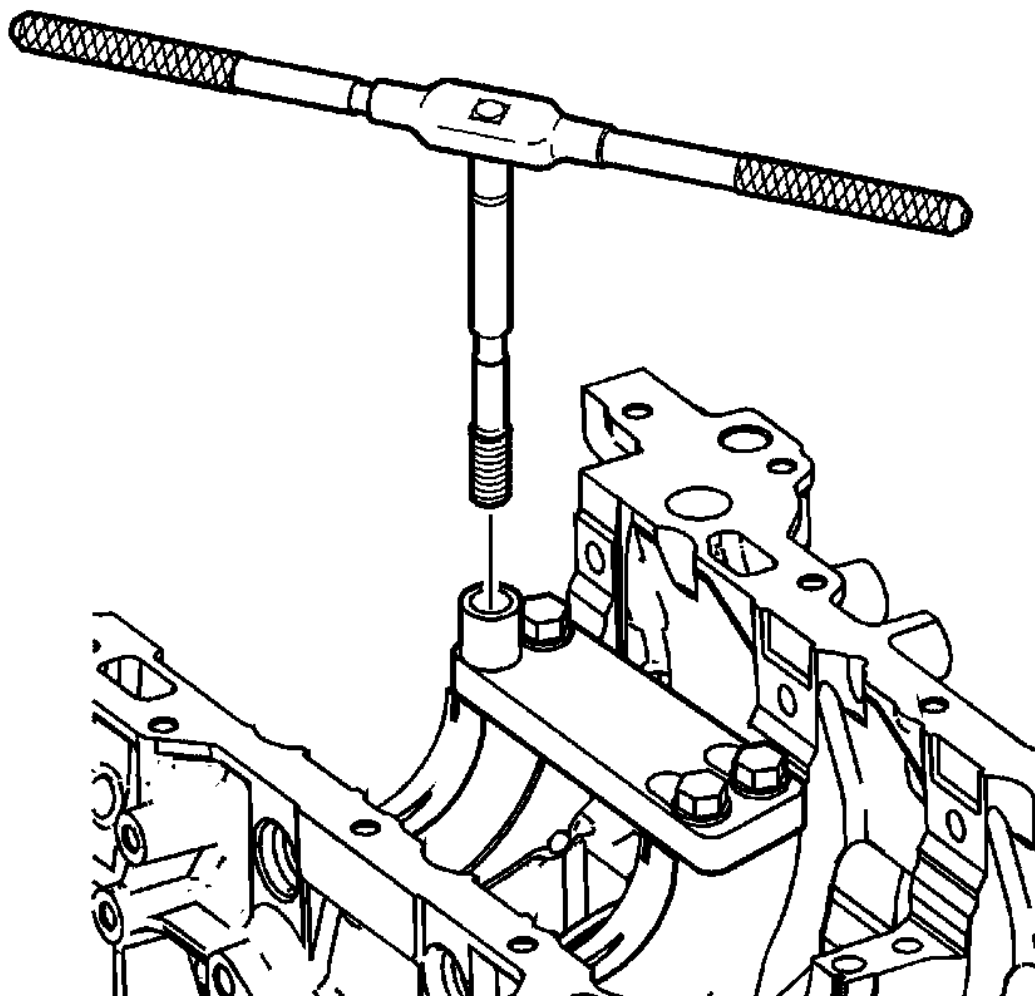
Identifying Insert & Driver Installation Tool
